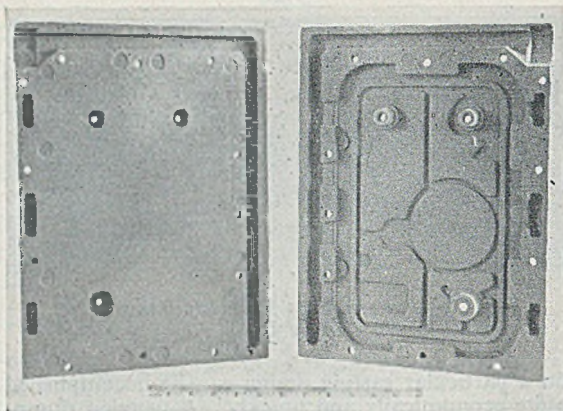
Mounting Panel Mould, Cope and Drag.
